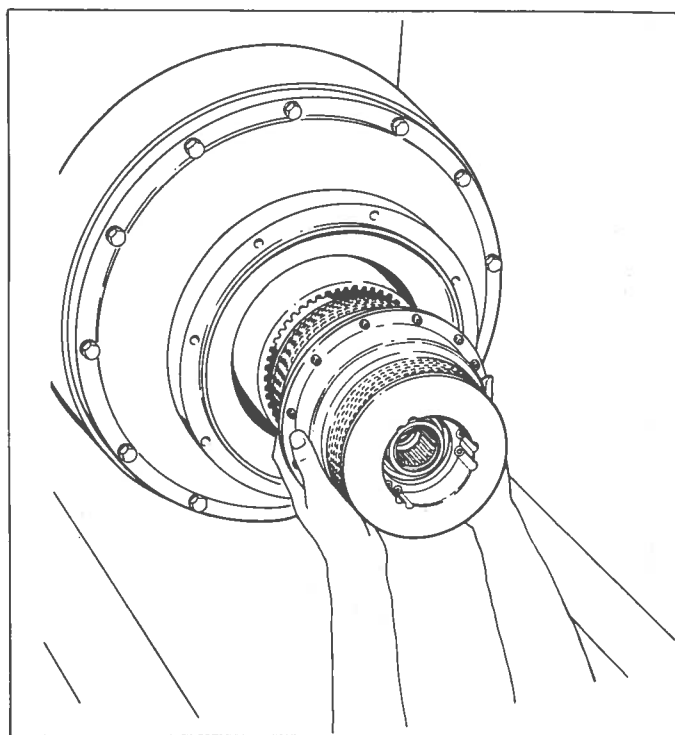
Removing Clutch Assembly from Clutch Driving Drum.
